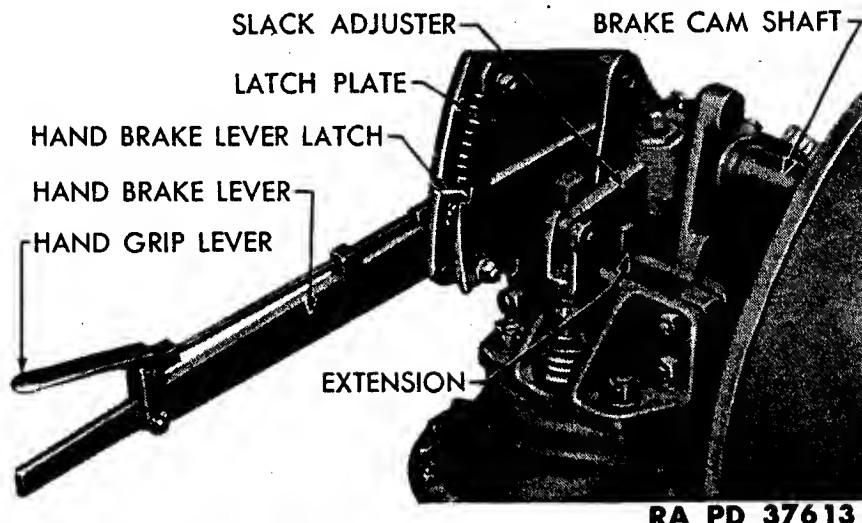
Hand brake lever and connections on the 155-mm gun carriages, M2 and M3
